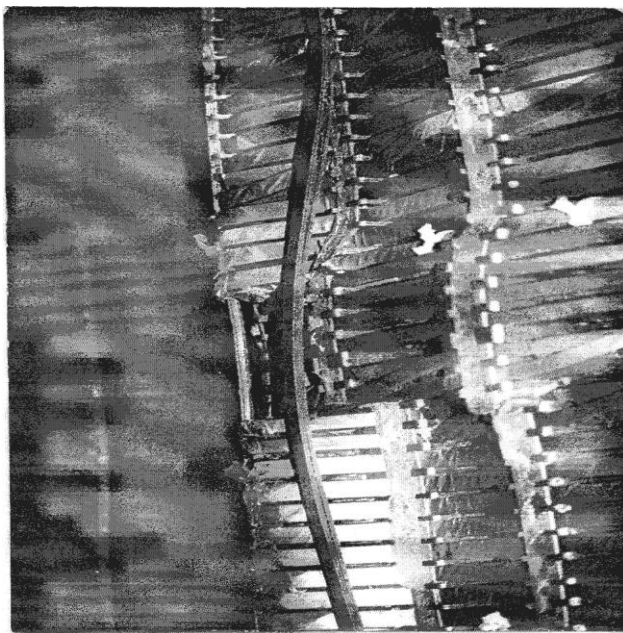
Fragment of transformer winding deformation feeding arc steelmaking furnaces
